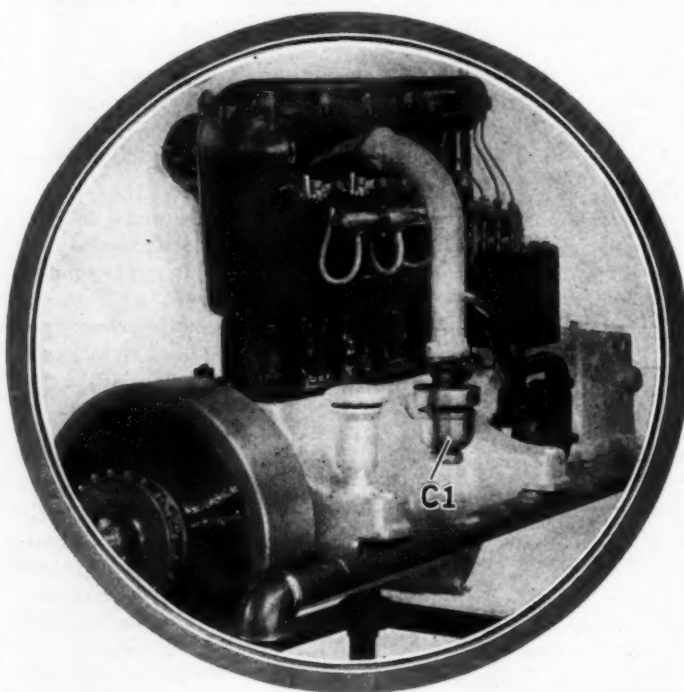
Perspective of the motor complete with the carbureter in place, showing the system of wiring from the magneto
